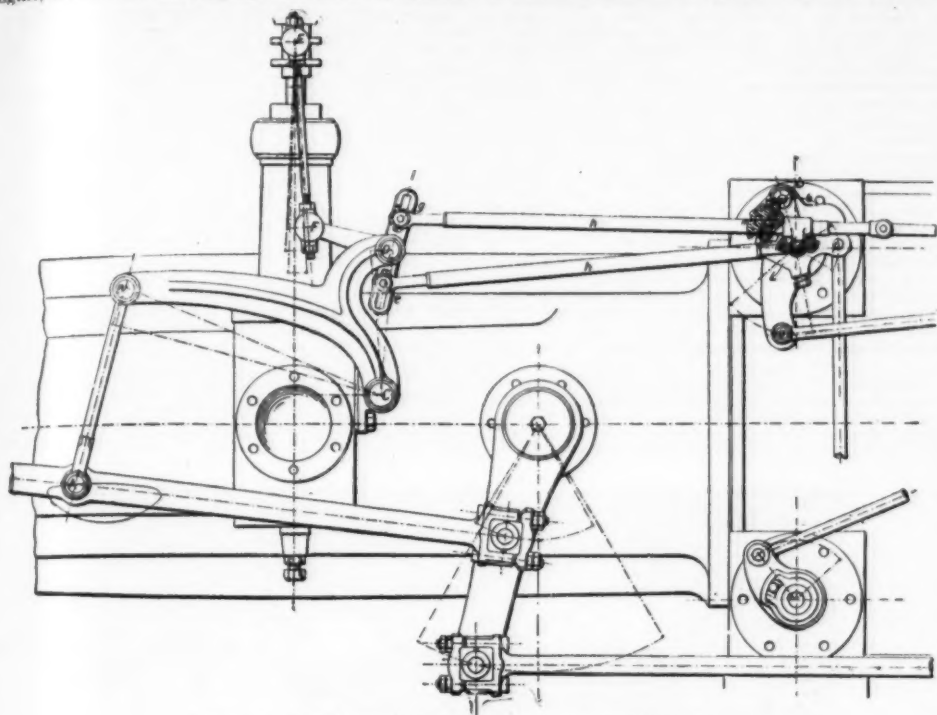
THE FRIKART-CORLISS VALVE GEAR.
